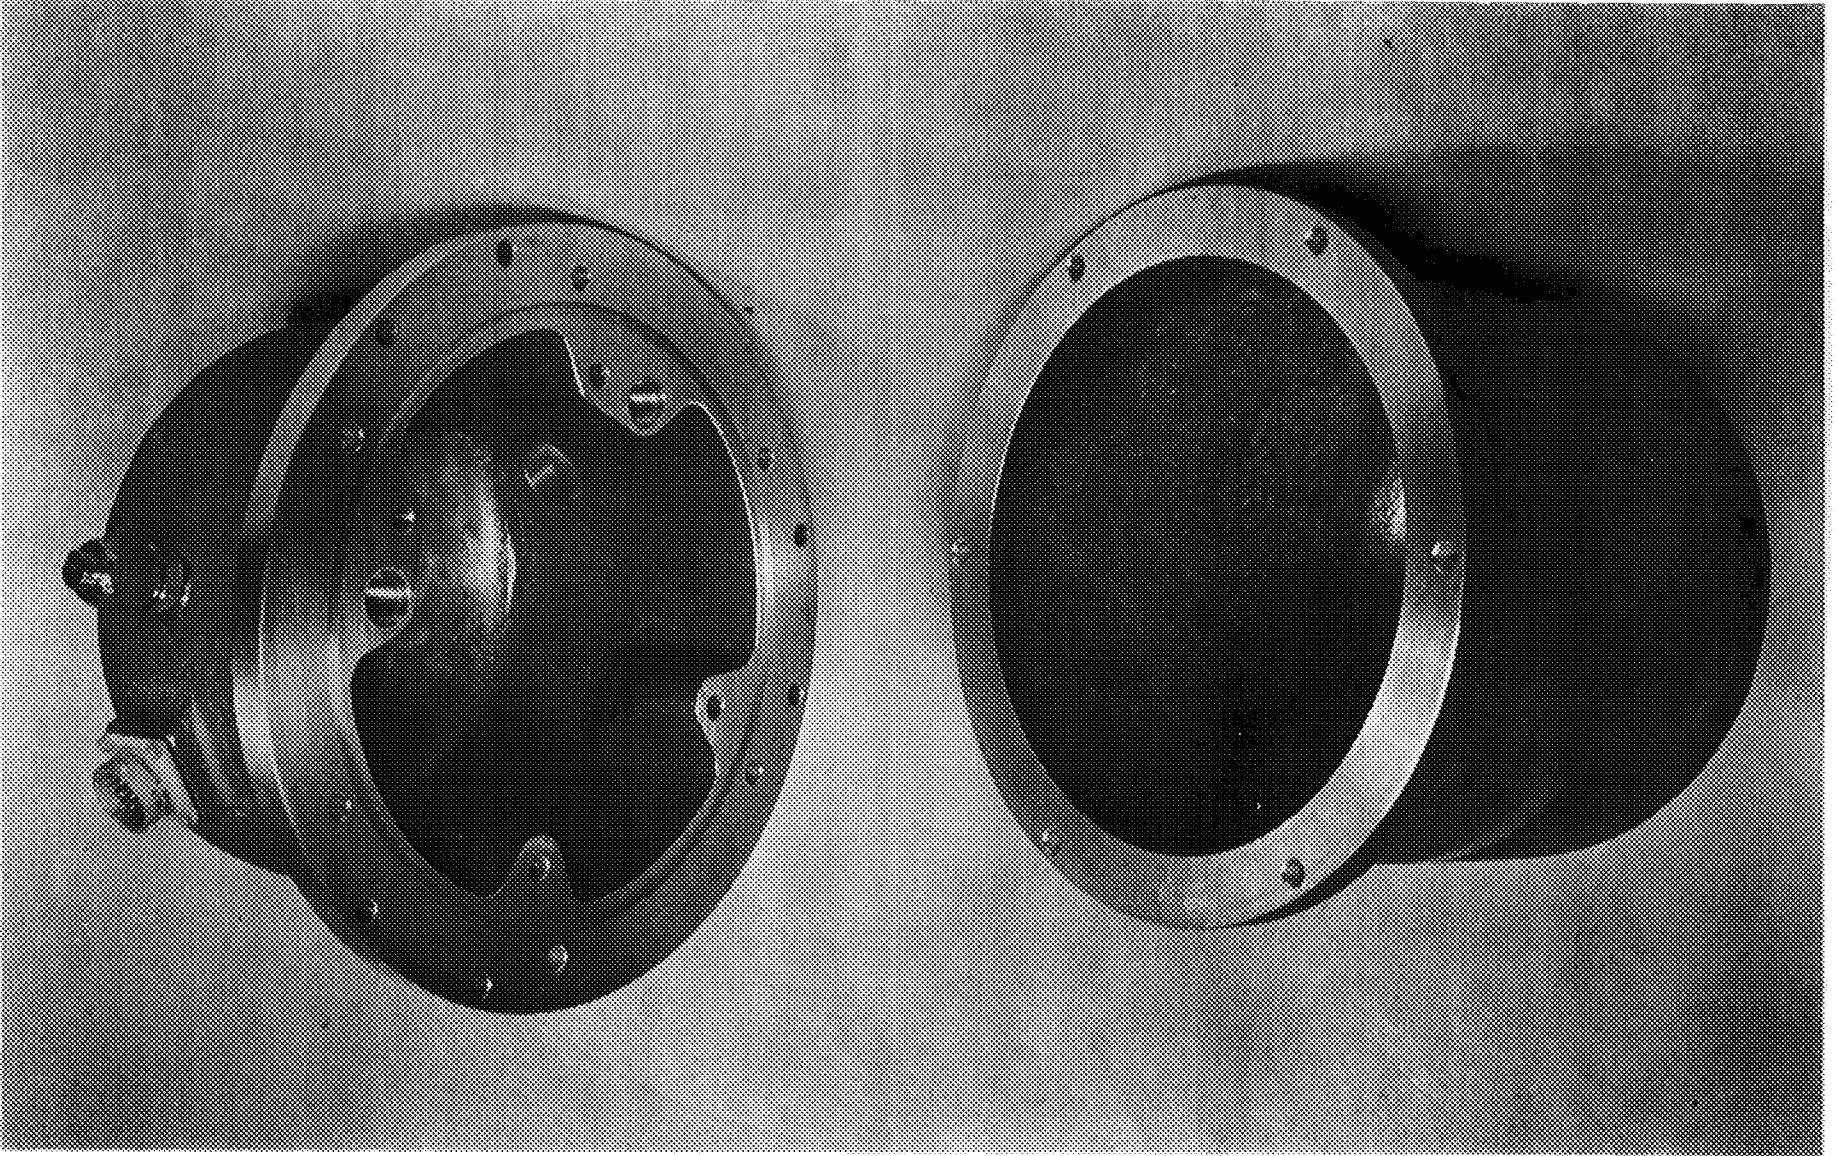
Assembly of Drive Solenoid and Almag 35
